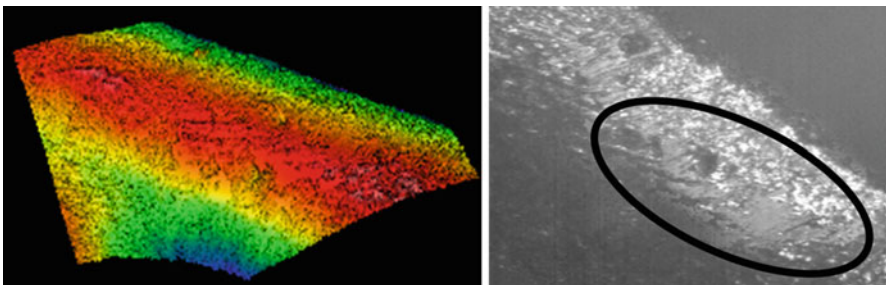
3D surface analysis on cutting tip for wet cut conditions
